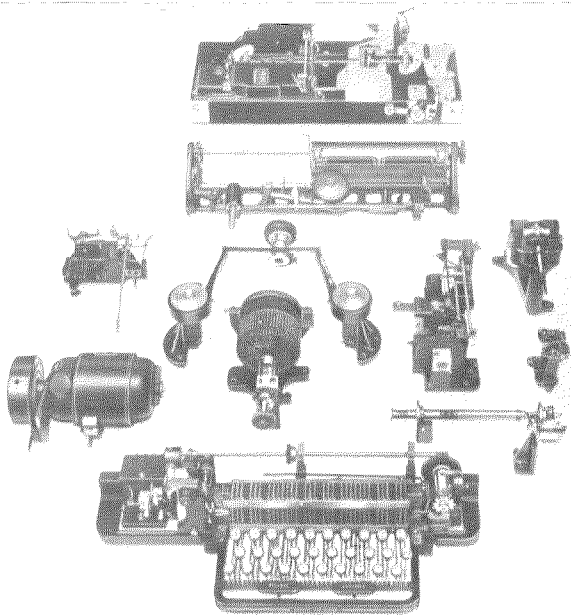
Detailed Assembly of All Units of New Creed Teleprinter.
